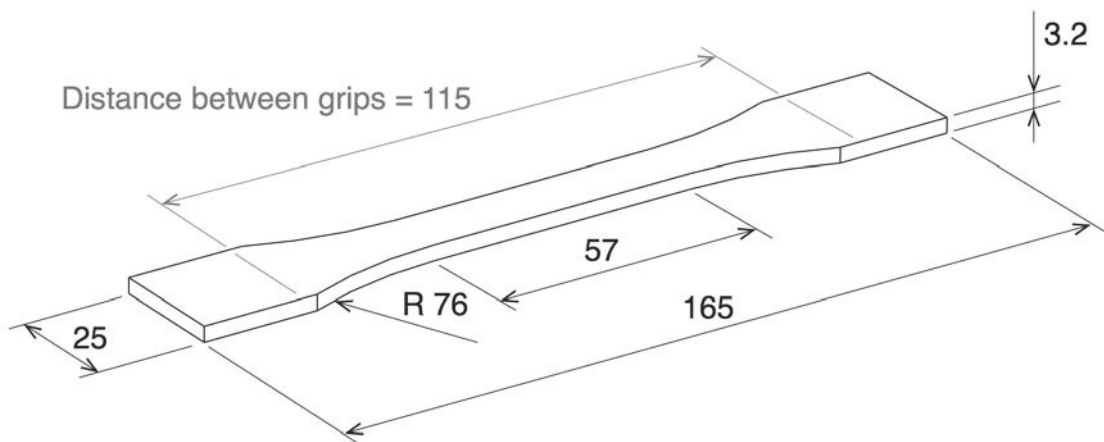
Dimensions of tensile test specimens (all dimensions in mm).
